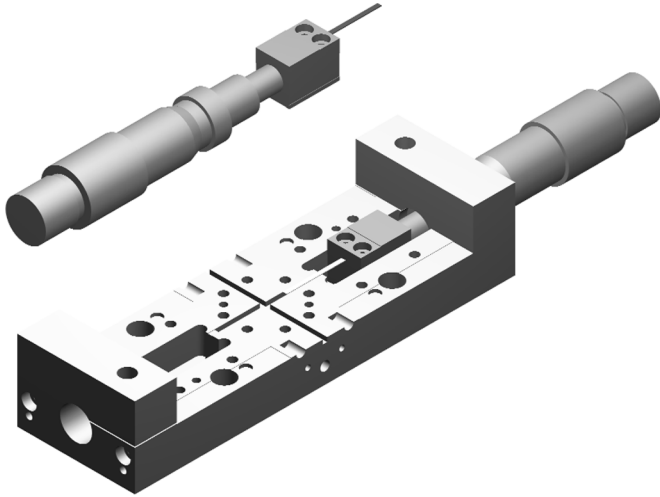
Waveguide impedance tuner with one split-waveguide block half removed. One micrometer head with a slide and dielectric slab is shown separately.
